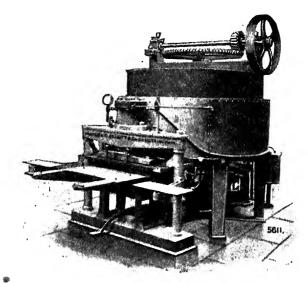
Automatic Cake Moulding Machine with Heating Kettle.
